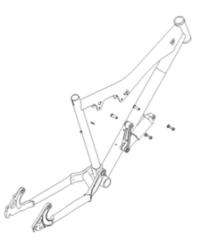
Dogbone-shock (2-3) assembly mounted to front triangle (1), exploded
